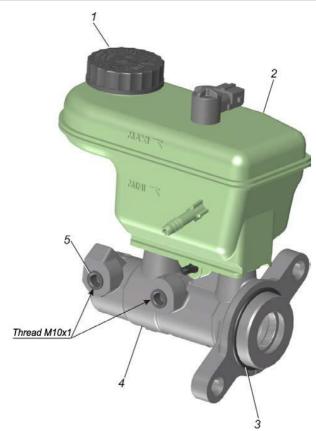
Brake master cylinder assembly with tank: 1 – tank cap; 2 – tank; 3 – O-ring; 4 – brake master cylinder; 5 – plugs
